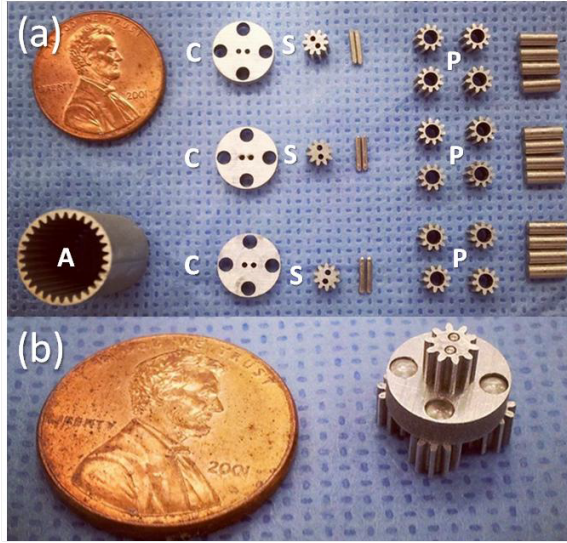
(a) Three-stage PG components fabricated by spark erosion. (b) One of the three stages assembled.
